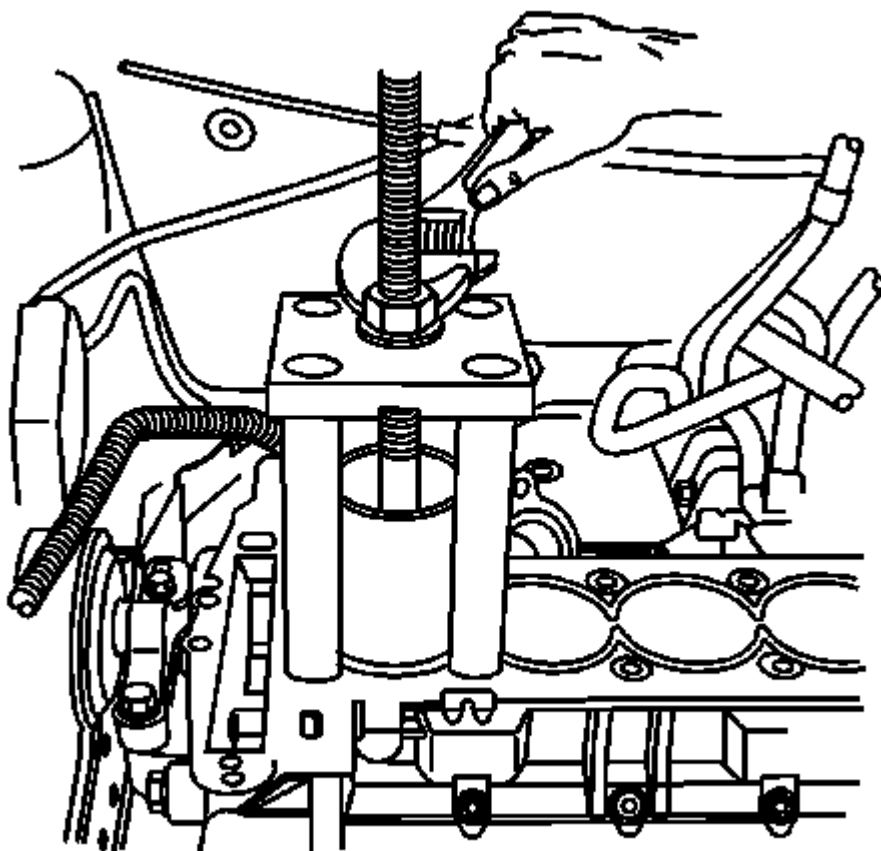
Identifying Cylinder Bore Sleeve Puller Nut
